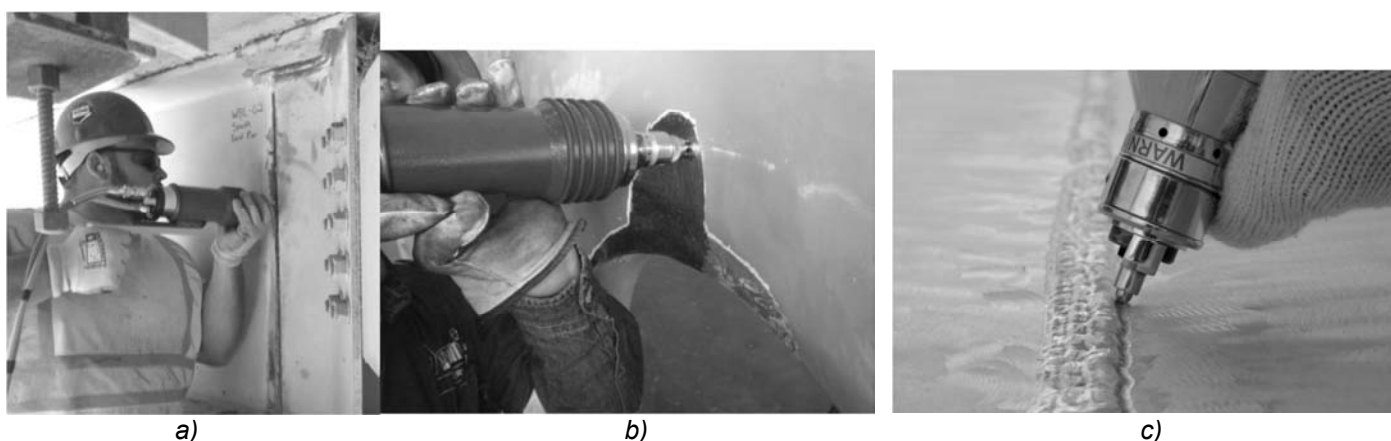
Industrial application of UIT/UP: a) fatigue improvement of welded elements of a highway bridge, b) final stage of fatigue crack repair in heavy mining equipment and c) for prevention of fatigue and corrosion cracking of large aluminium welded panels
